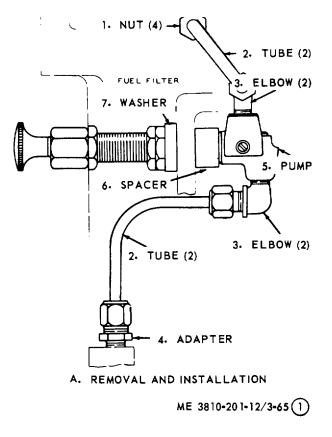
Primer pump (for engine model D333TA) removal, disassembly, reassembly and installation (sheet 1 of 2).
